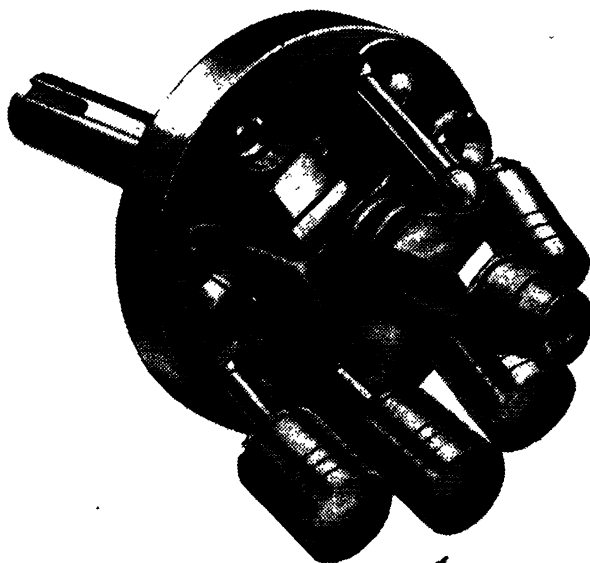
Socket ring and main-shaft group. (*Waterbury Tool, Division of Vickers Inc., Waterbury, Conn.*)
